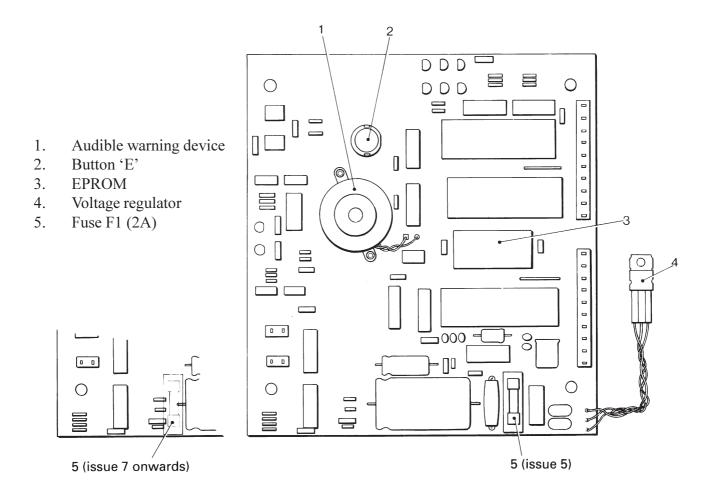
Controller board (see also Fig. 4 items 15 and 16 for reverse side of board)
